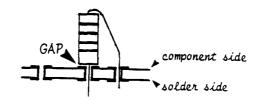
INSTALLING A RESISTOR ON ITS END.
